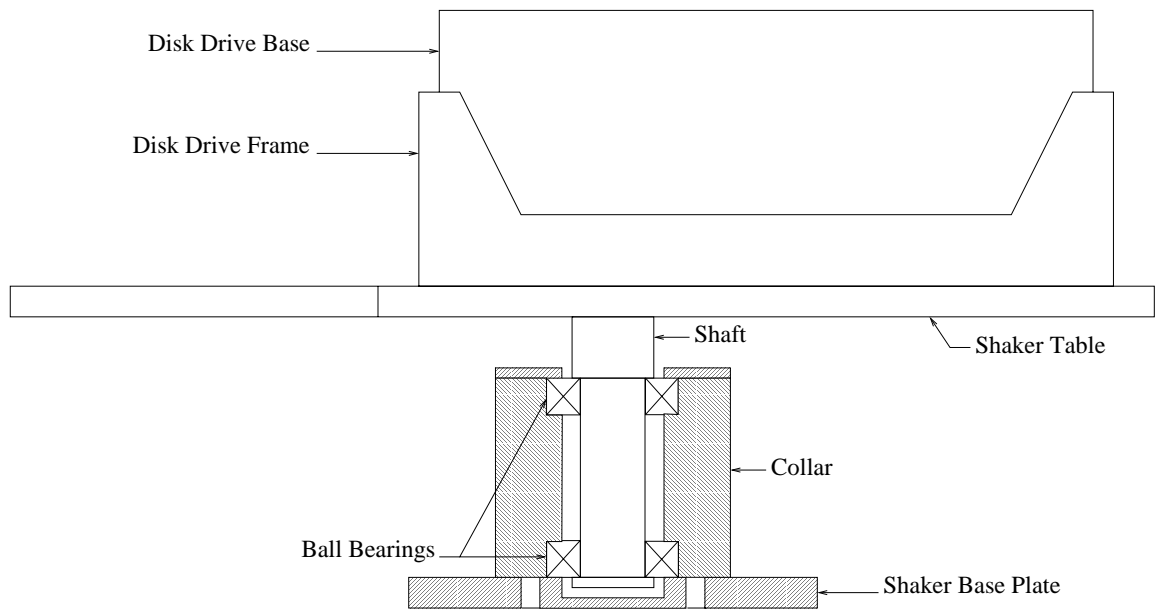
Side View of the Rotary Shaker Table and the Disk Drive
